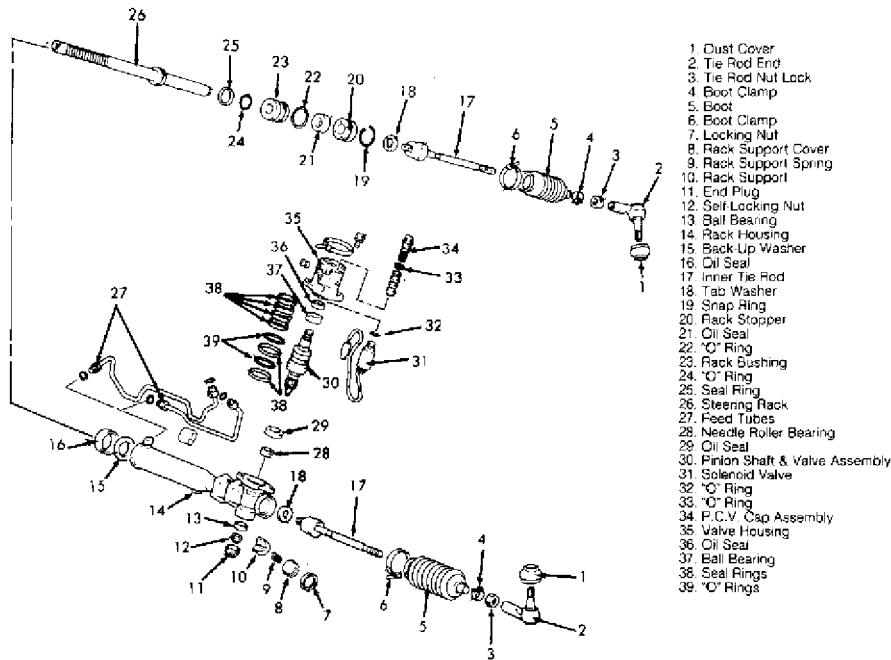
Exploded View Of Electronic Power Rack & Pinion Assembly (Diamante & Galant With Electronic Power Steering)
